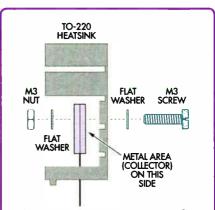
transistors Q4-Q6 must be attached to TO-220 heatsinks as shown here. Insulating pads are not necessary, but you should apply heatsink compound to the mating surfaces.
